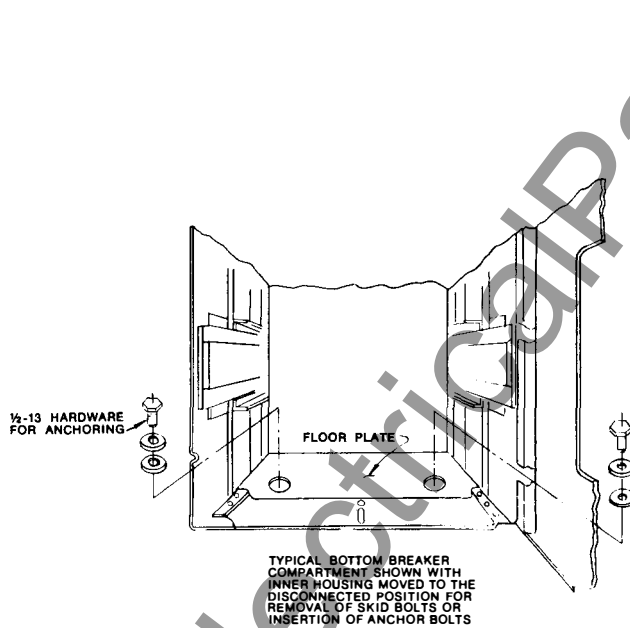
(0673D0500-265) Location of skid bolts (and anchor bolts) in front of Indoor Equipment
